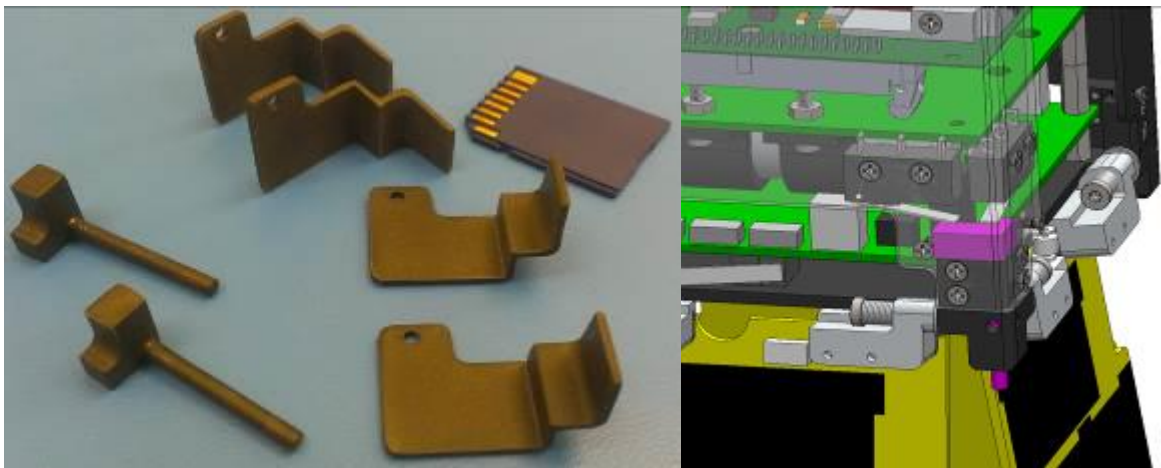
Deployment Extensions and Solar Panels Clips shown before Integration (L). CAD photo of Deployment extension (purple for clarity) integrated into spacecraft (R). Solar Panel clips can be seen in Figure 6 at bottom of deployed Solar Panels
